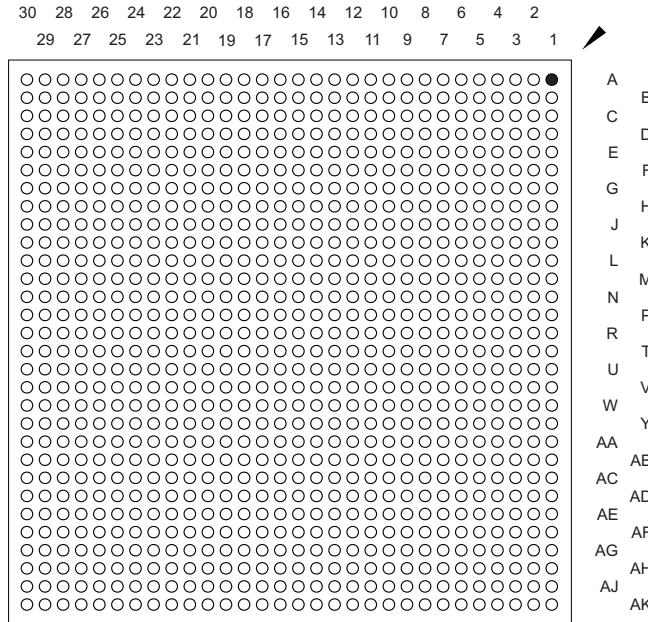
CMS 900-Pin BGA Package (Bottom View)
